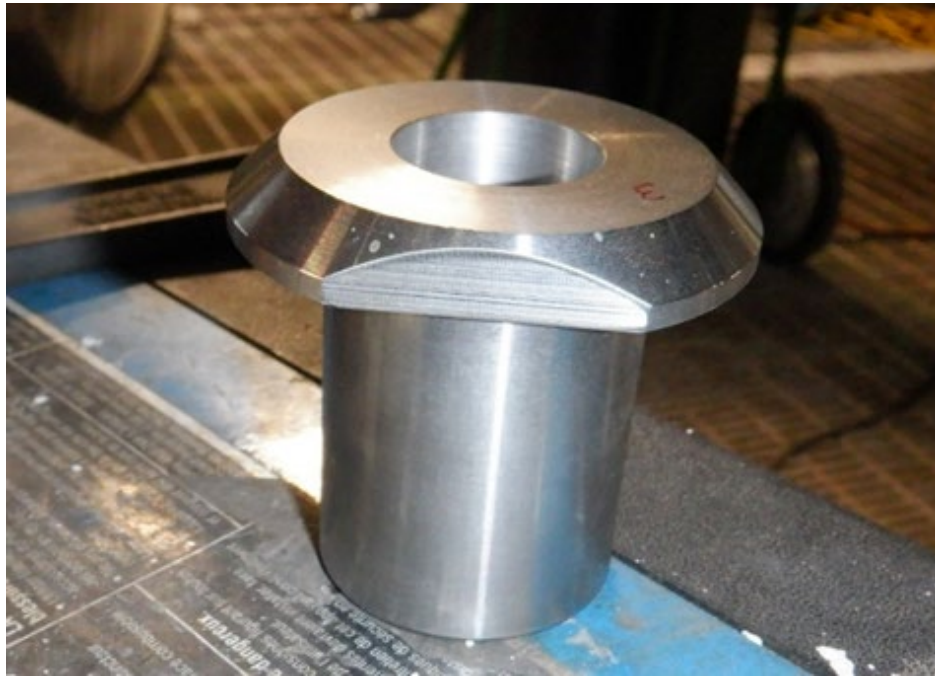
“Top hat” Style Tube Plug to be used in Drums after Tube Stub has been Removed
